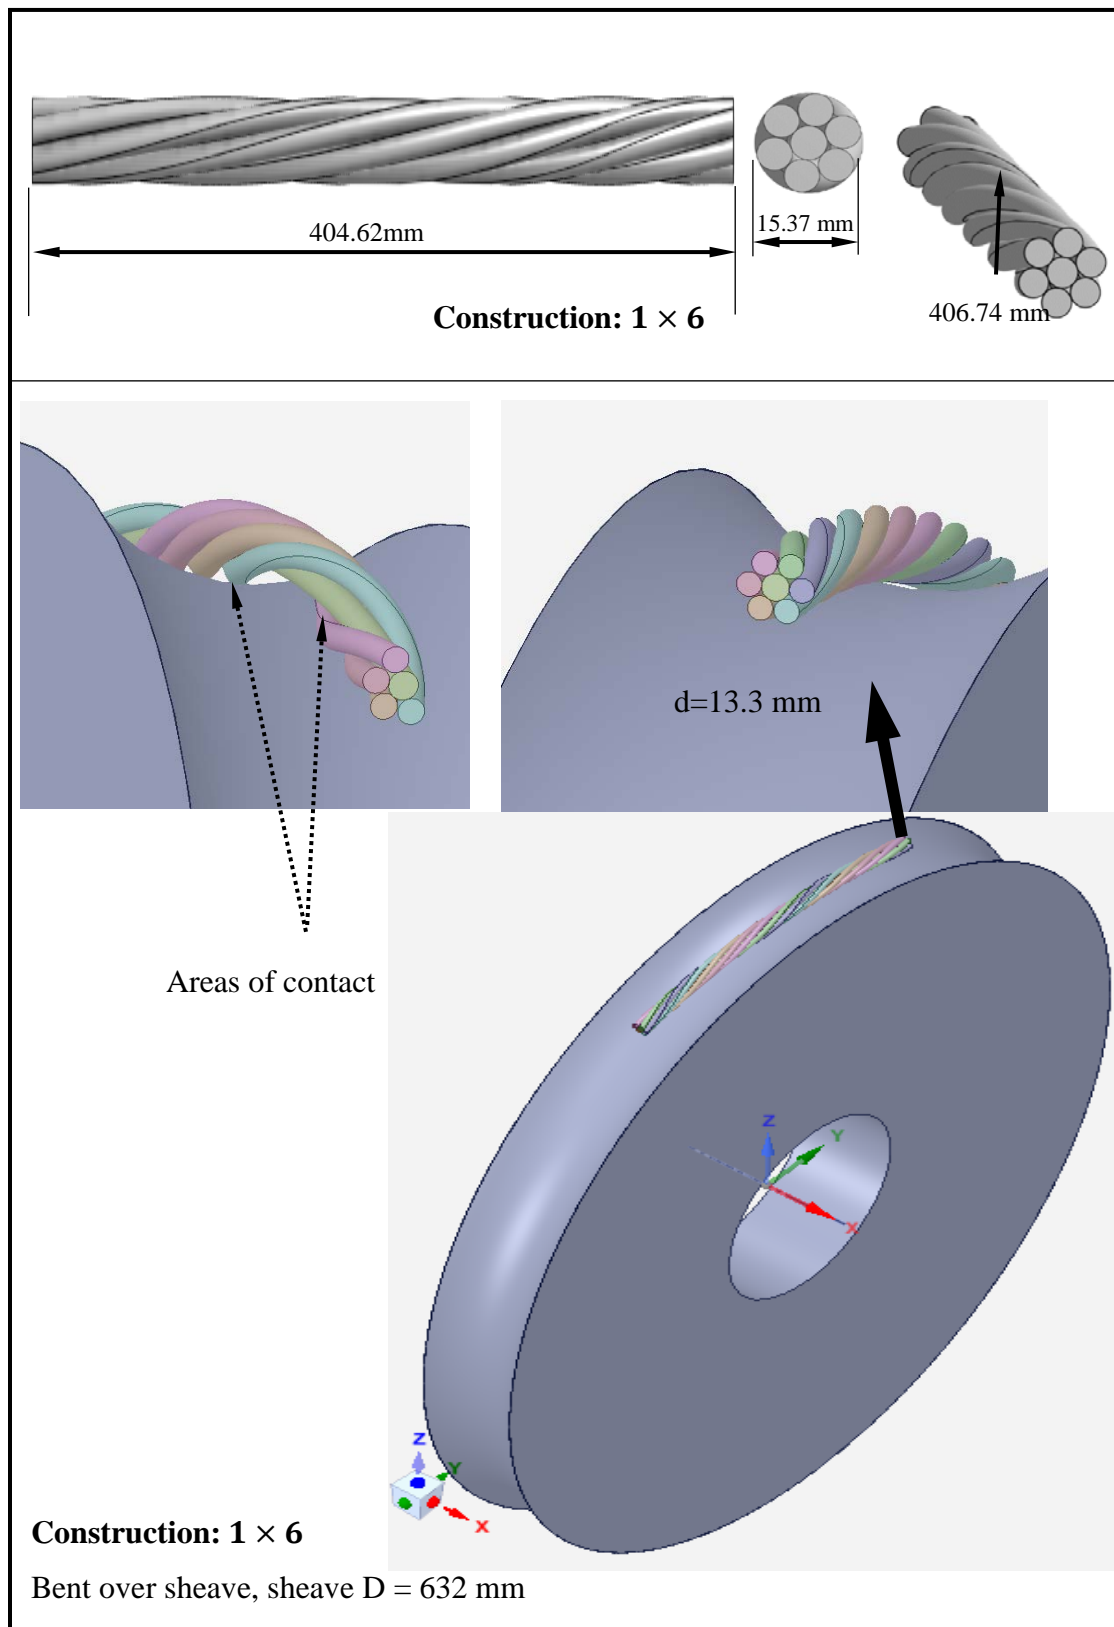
Geometry and construction of straight and bent wire ropes (1×6)
